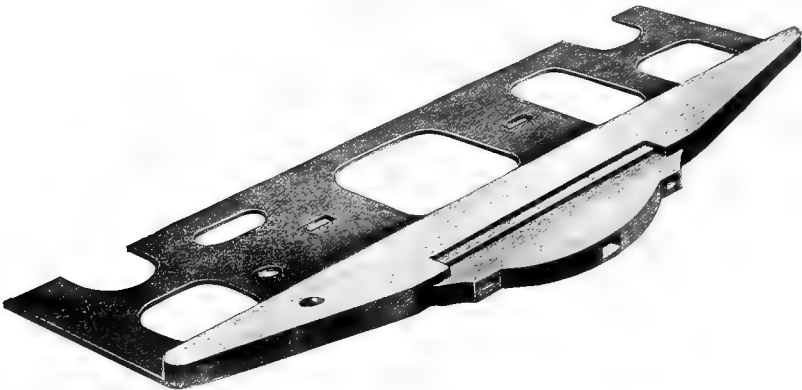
Commonwealth Steel Company's One Piece Cast Steel Buffer Sill and Anti-Telescoping Plate for Non-Vestibuled Cars.
